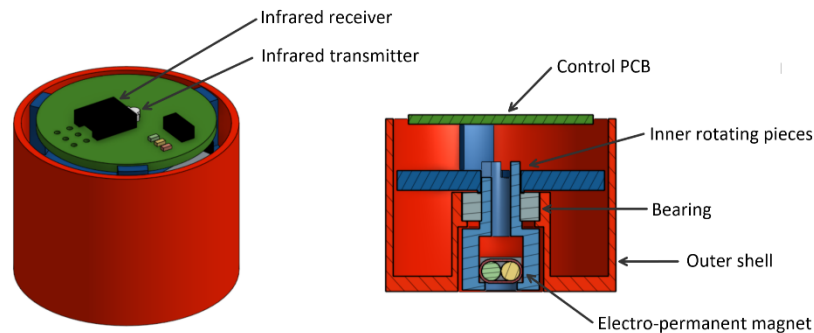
Labeled CAD models of an assembled SpinBot (left) and a simple section view (right)
